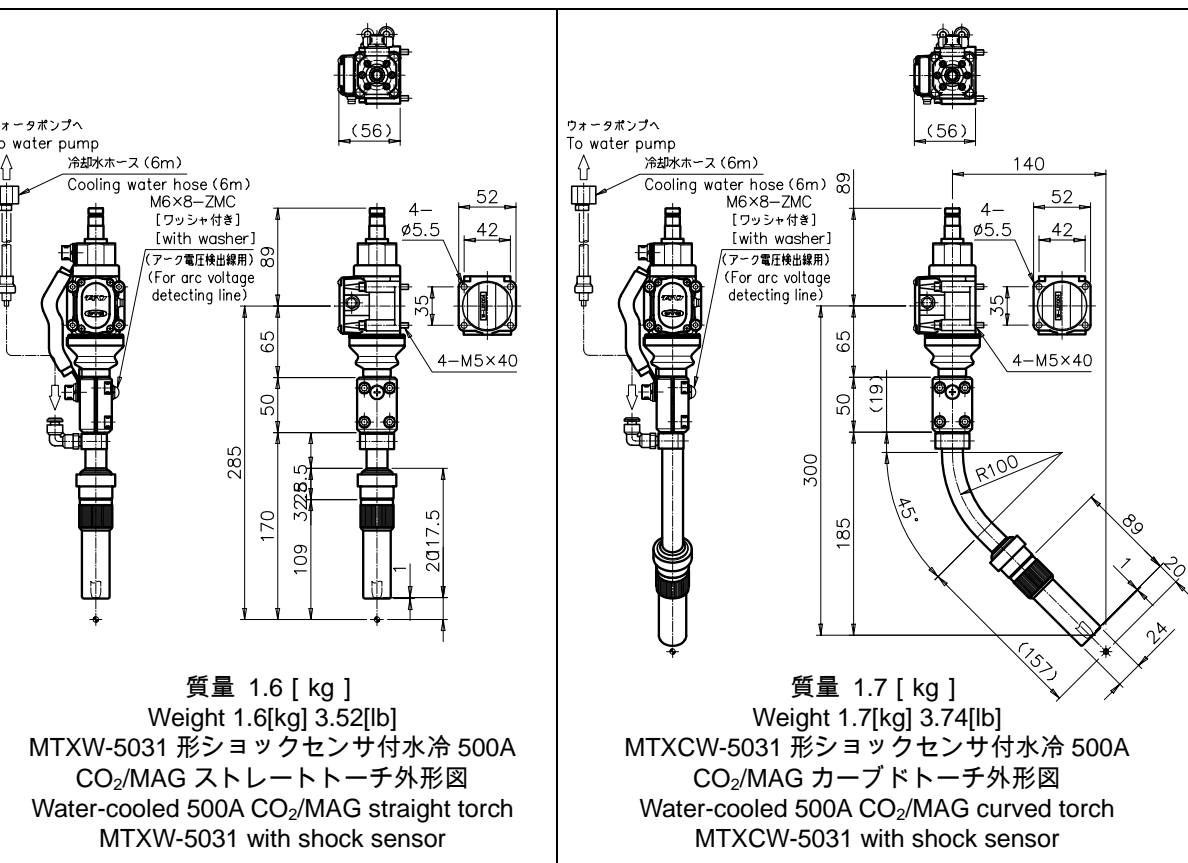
Outline drawing of water-cooled 500A torch Unit (mm)
